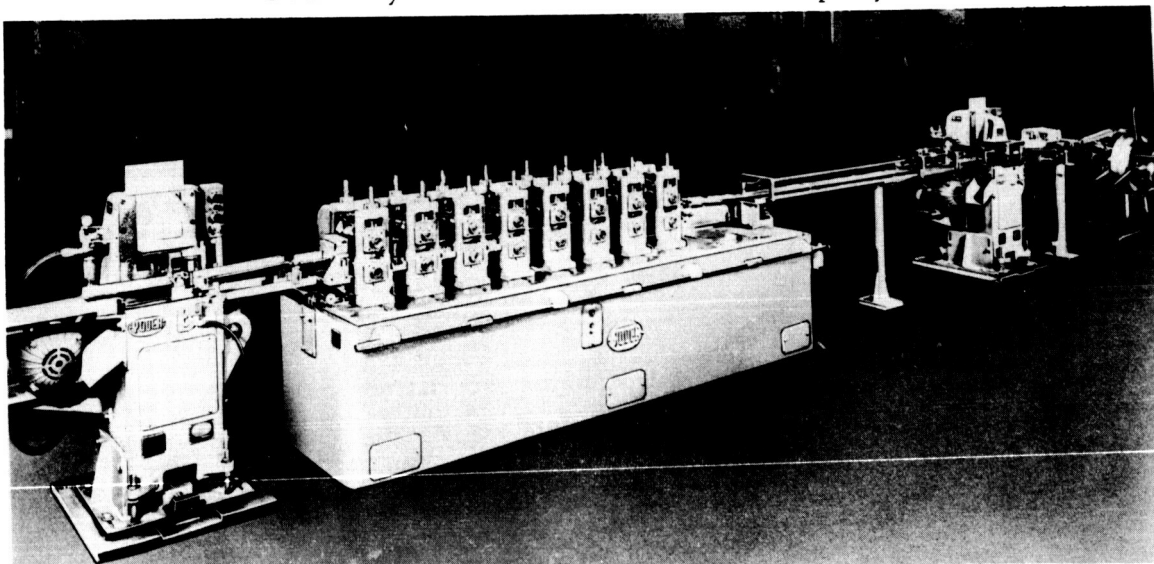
TYPICAL ASSEMBLY OF ROLL-FORMING PRODUCTION EQUIPMENT
